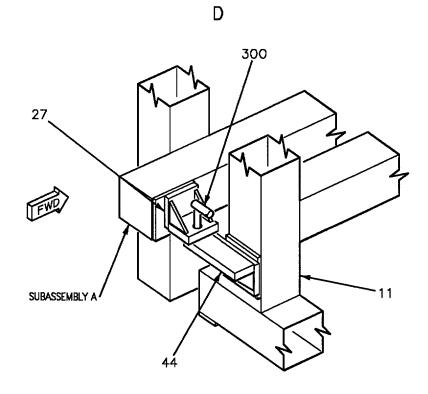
Assembly of Frame and Subassembly A (Sheet 2)
